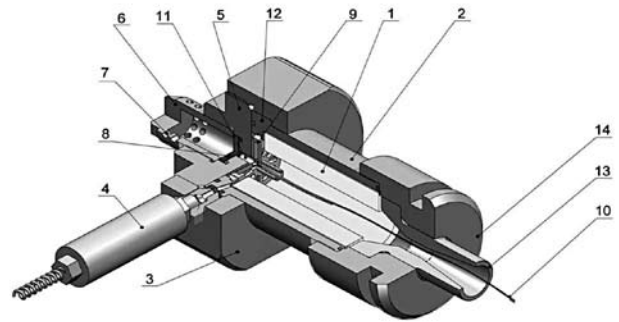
Laboratory rocket motor (LRM) with propellant element in isometric view, in half section: 1 – rocket propellant; 2 – burning chamber; 3 – front mounting; 4 – pressure transducer; 5 – front closure; 6 – perforation securing nut; 7 – side holes; 8 – safety diaphragm; 9 – igniter; 10 – conductor; 11 – port; 12 – flange; 13 – nozzle; 14 – back mounting
